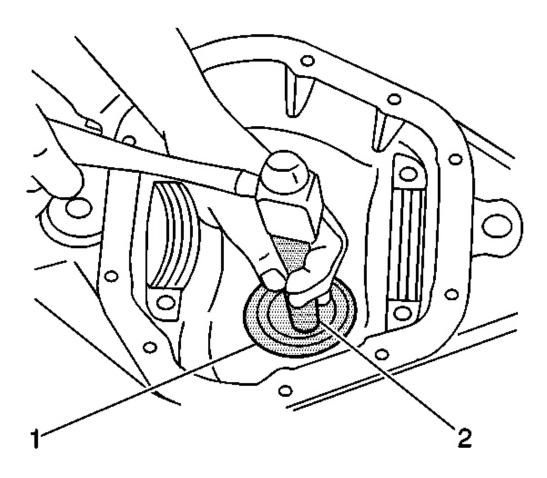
View Of Outer Pinion Bearing Cup Installation Tool Courtesy of GENERAL MOTORS CORP.
